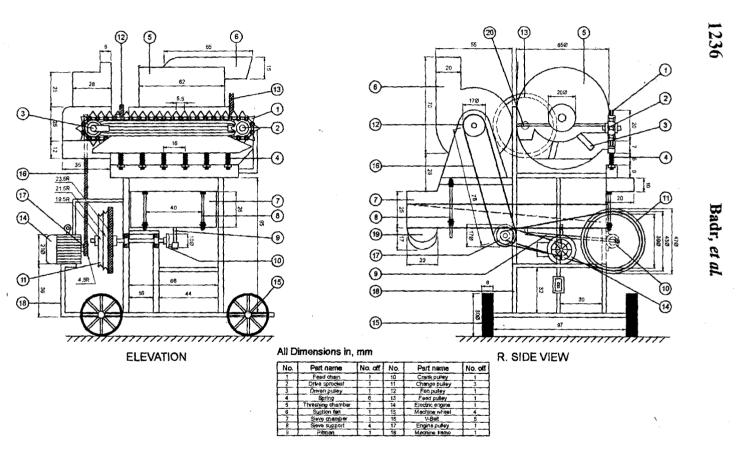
Elevation and right side view of the developed aromatic threshing machine.
